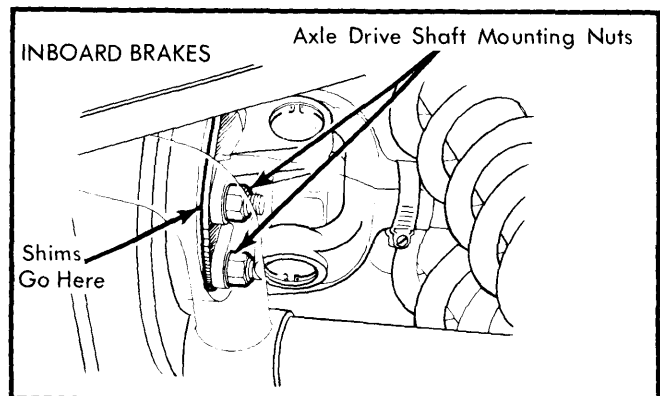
Placement of Shims for Rear Camber Angle Adjustment
